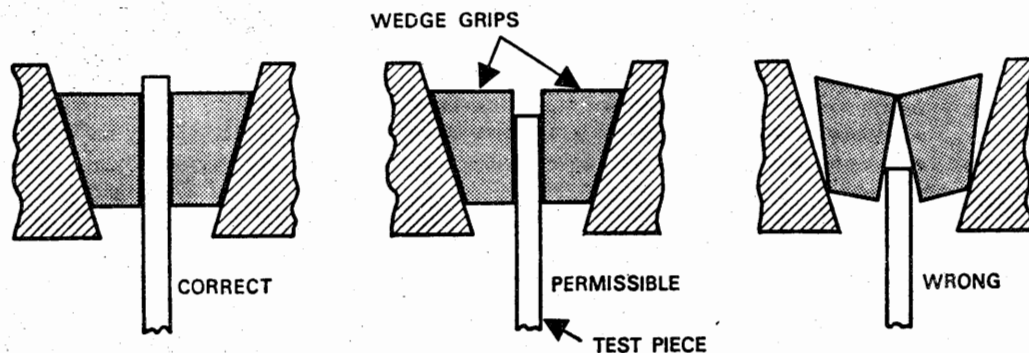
ARRANGEMENT OF WEDGE GRIPS
